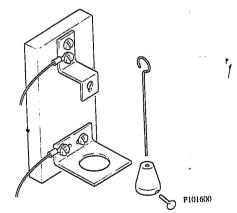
PLUMB BOB TILT ASSEMBLY
